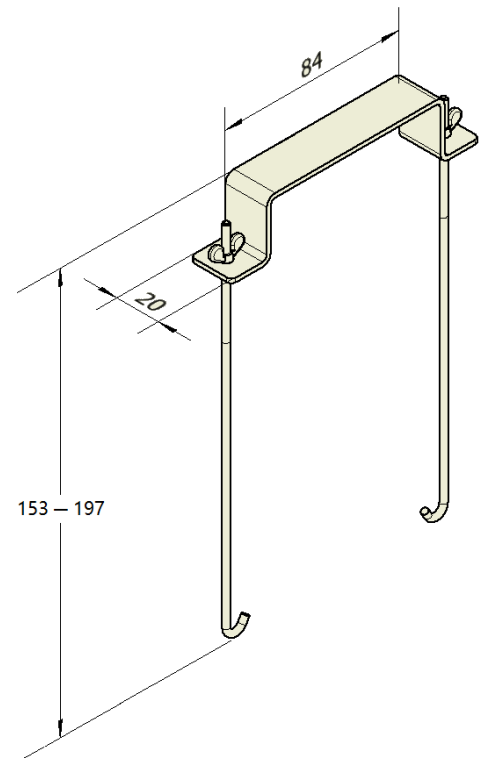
Bail Assembly Kit Dimensional Information (mm)
